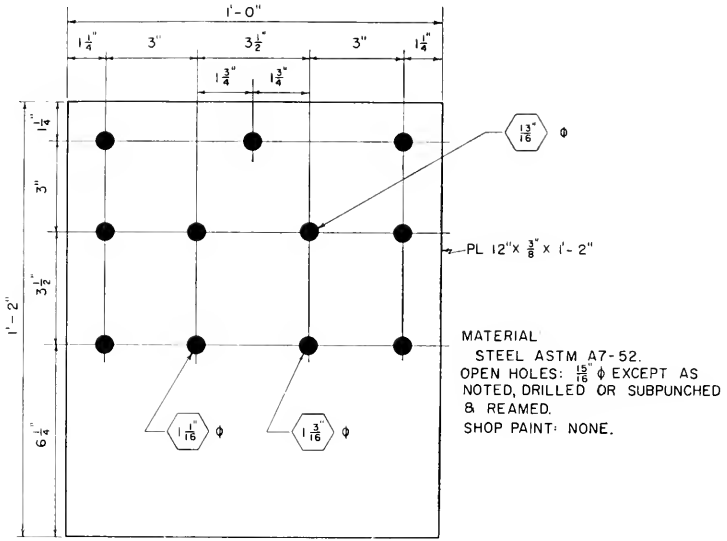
A TYPICAL TEST PLATE FOR TIGHTENING BOLTS
